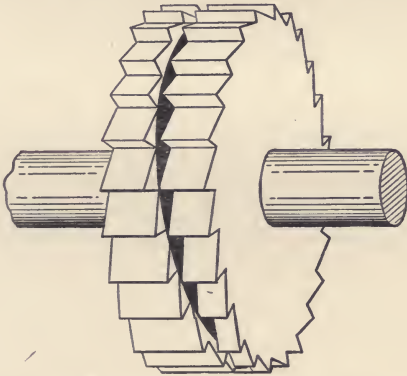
ADJUSTABLE CUTTERS FOR GROOVING.
